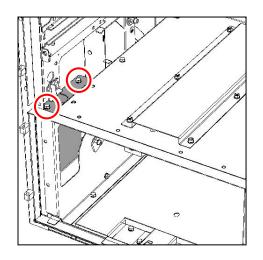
2 bolted joints on metal cover in switching-device compartment
